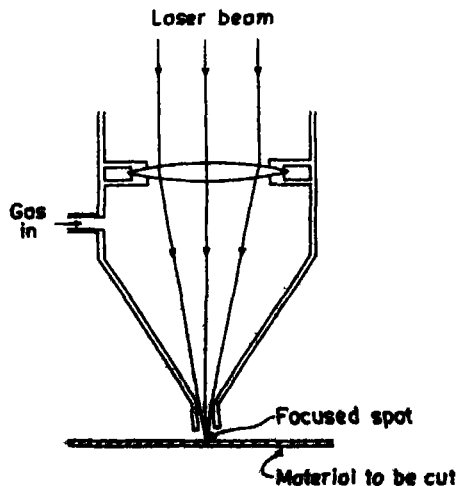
A gas-jet-assisted laser cutting scheme. The gas jet assists in expelling the molten material from the cut.
